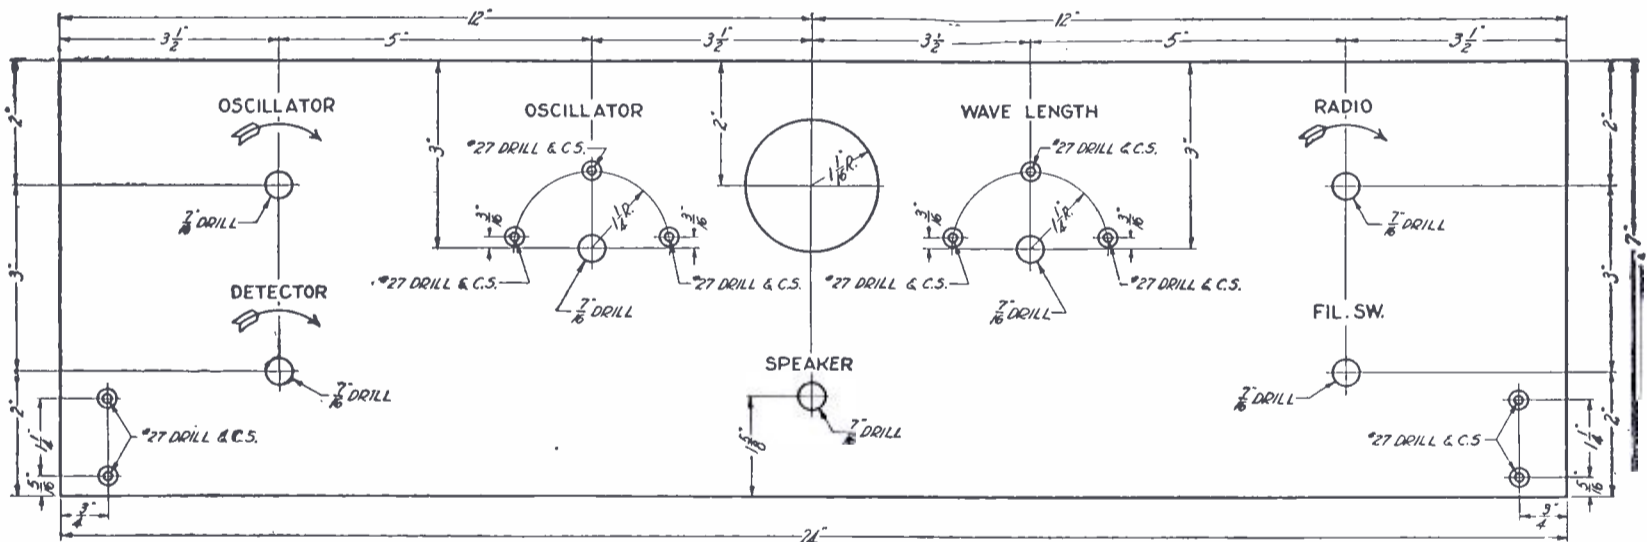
Panel lay-out, showing size of holes to drill, and suggested engraving
